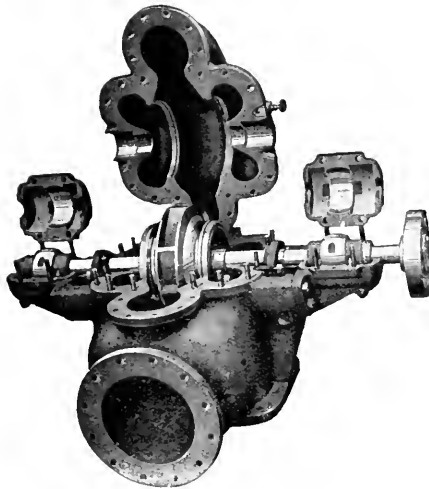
Double Suction Volute Pump, with Casing Open Ready for Inspection.
